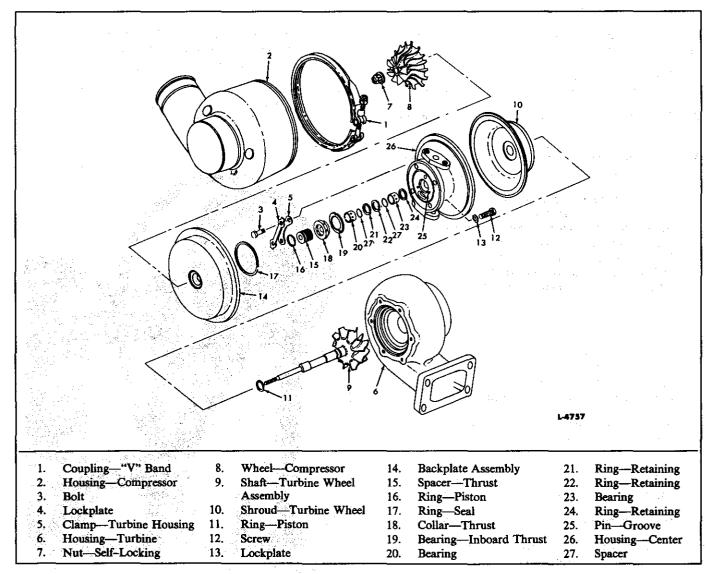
Model TE0675 Turbocharger Details and Relative Location of Parts
